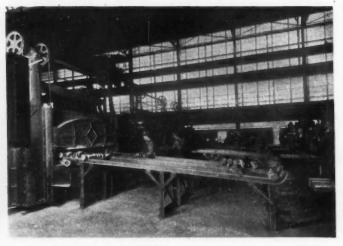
DISCHARGING END OF ANNEALING FURNACES
